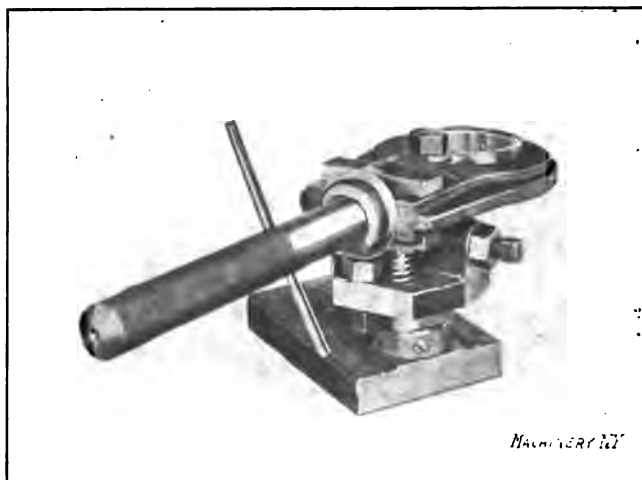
A Special Fixture for Cutting Oil Grooves in the Equalizing Gear Bushing
